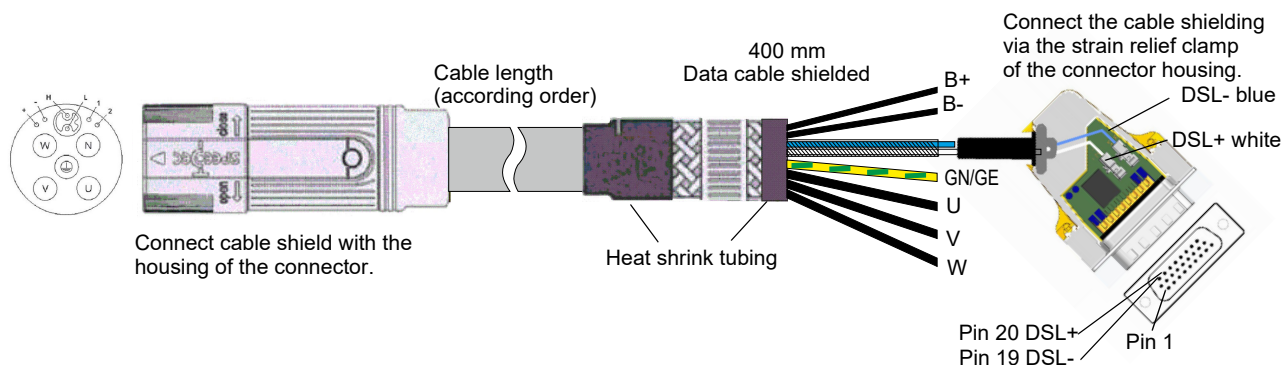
Motor cable with HIPERFACE DSL® 28 A
